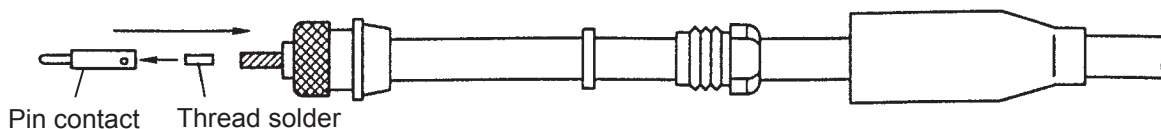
Coaxial Cable Shield Treatment and Pin Contact Soldering
